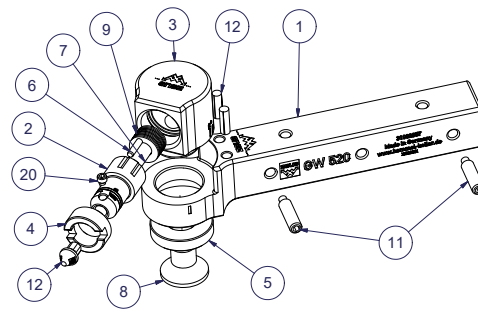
Exploded diagram of CNC-lathe version GW520-16U
